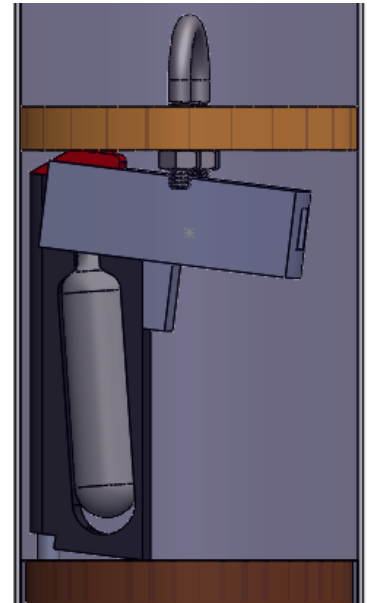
CO₂ separation system assembly installed on airframe bulkhead inside model rocket.
